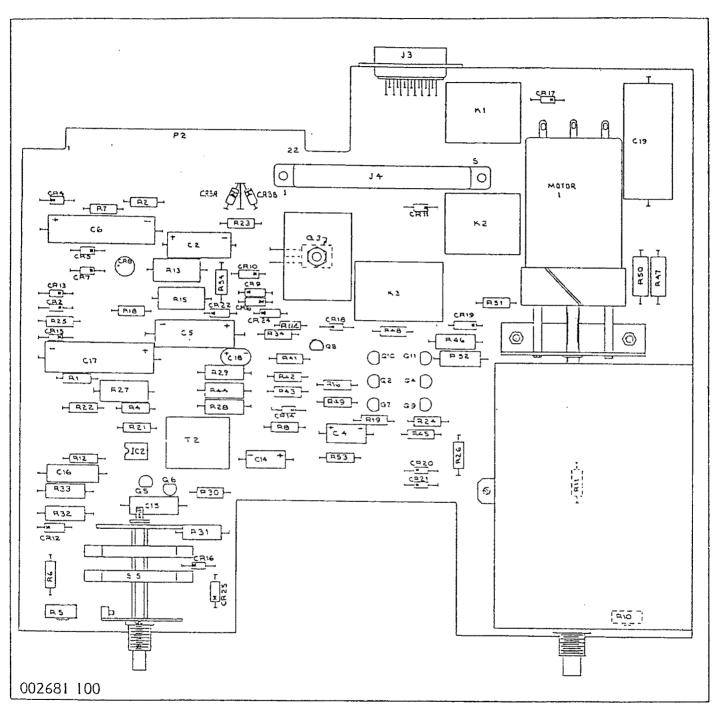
LOCATION OF COMPONENTS ON MAIN PRINTED CIRCUIT BOARD
